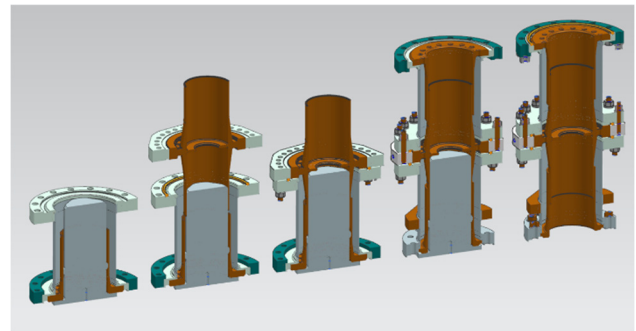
Assembly sequence of outer conductor with copper shields using Teflon jig.
